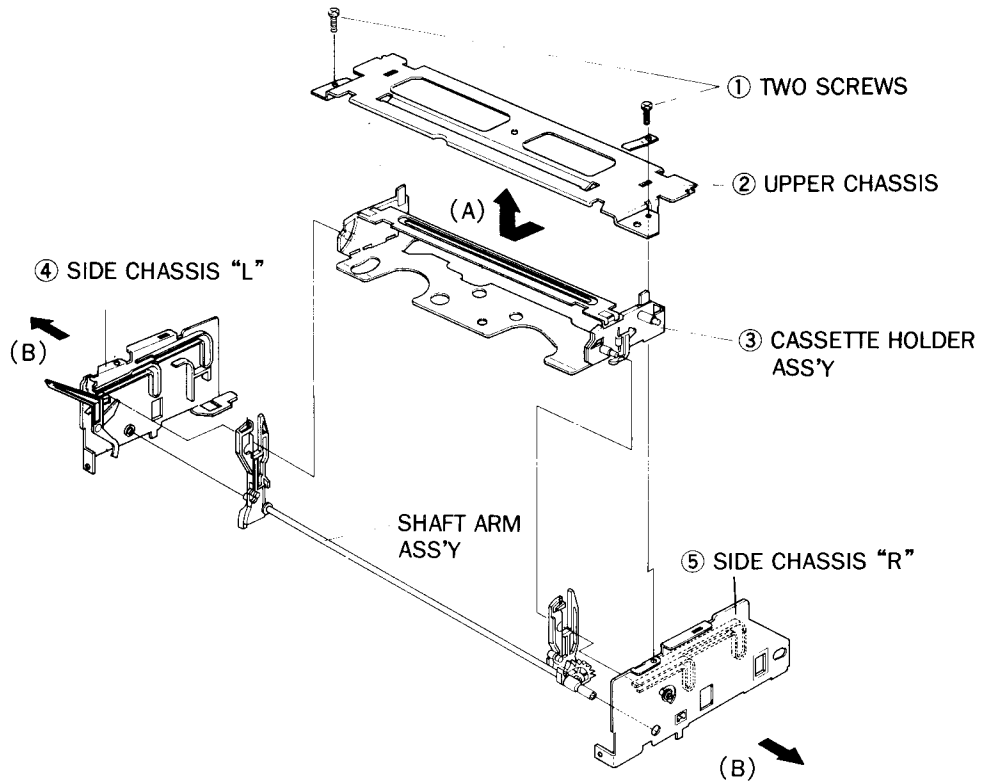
Cassette Holder Ass'y & Side Chassis "L", "R" Removal
